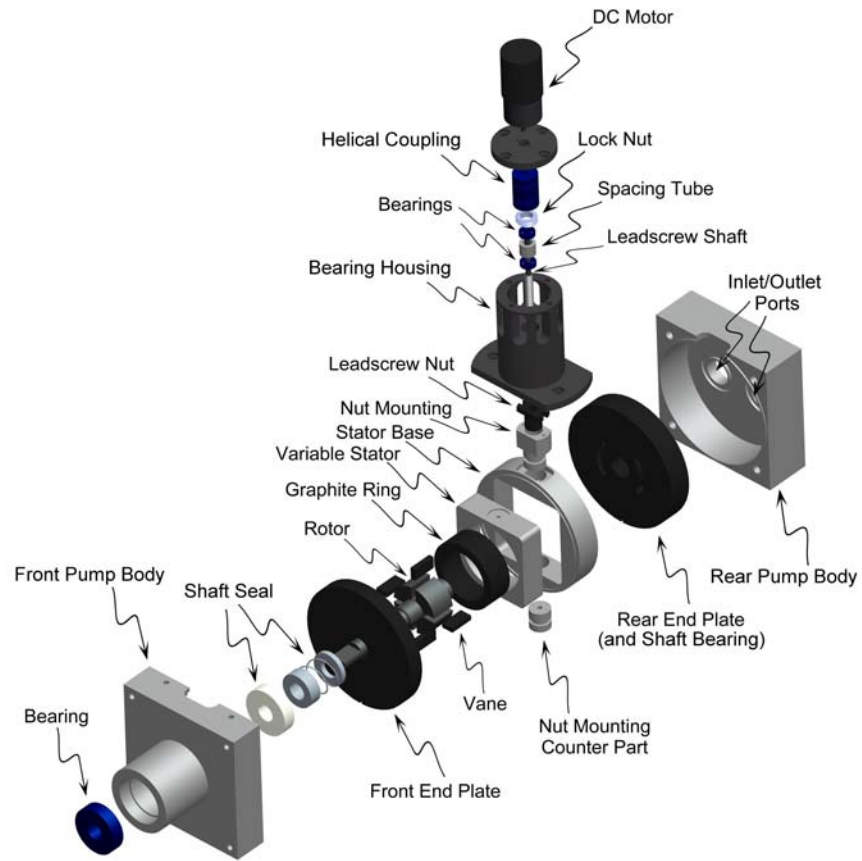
The exploded view with all the mechanical parts of VDVP.
